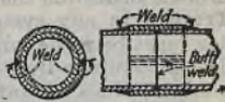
Sleeve line weld made by first butt-welding the pipe ends and then reinforcing with a split sleeve, which minimizes the stress on the butt weld.
